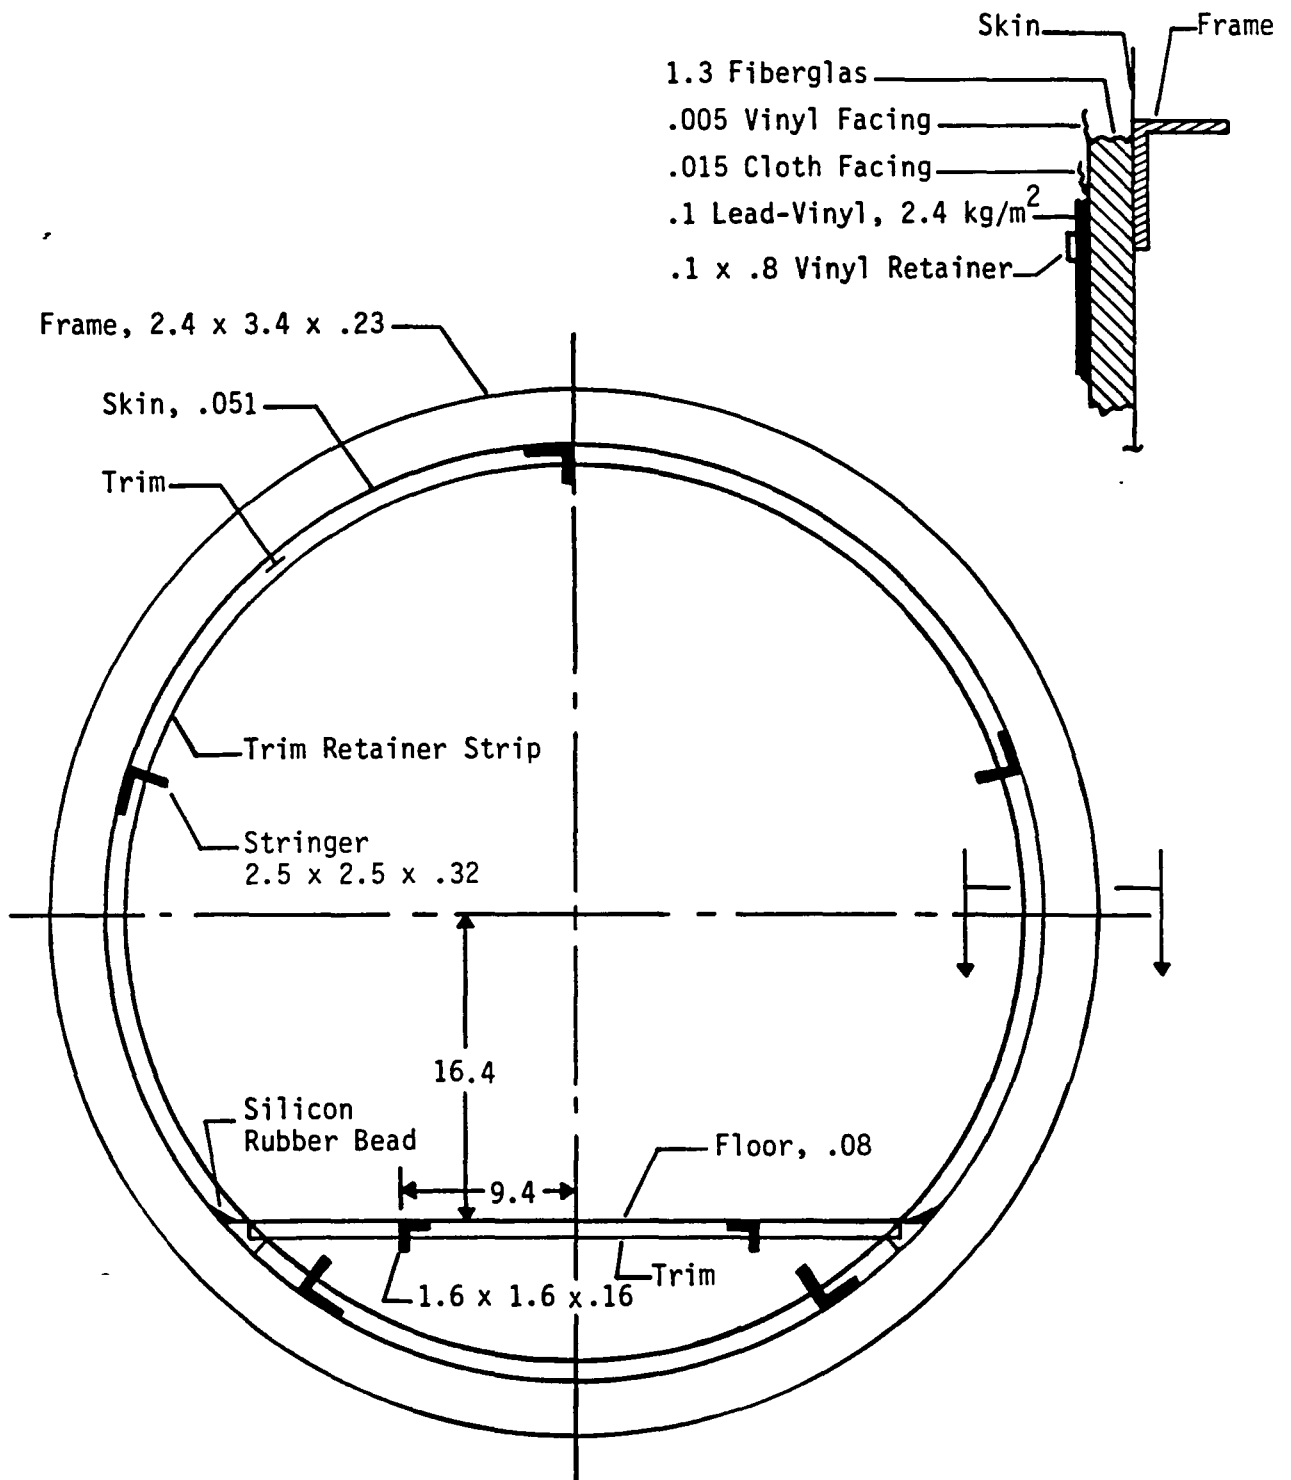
CROSS SECTION OF STIFFENED CYLINDER WITH FLOOR
